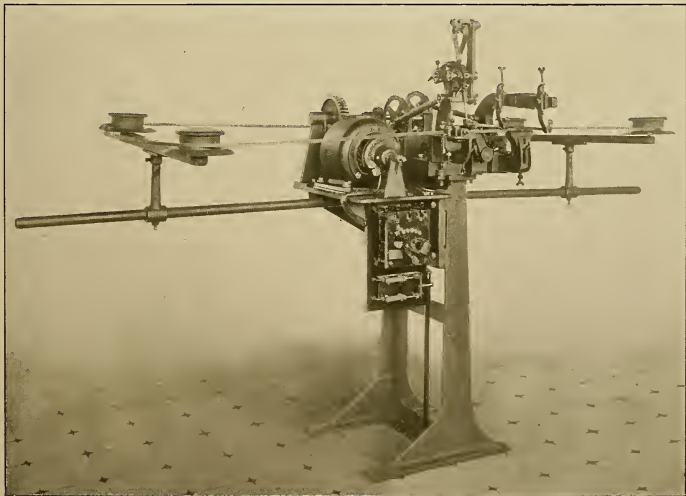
AUTOMATIC BAND SAW SHARPENER DRIVEN BY A MOTOR MADE BY THE CROCKER-WHEELER COMPANY, AMPERE, N. J.
